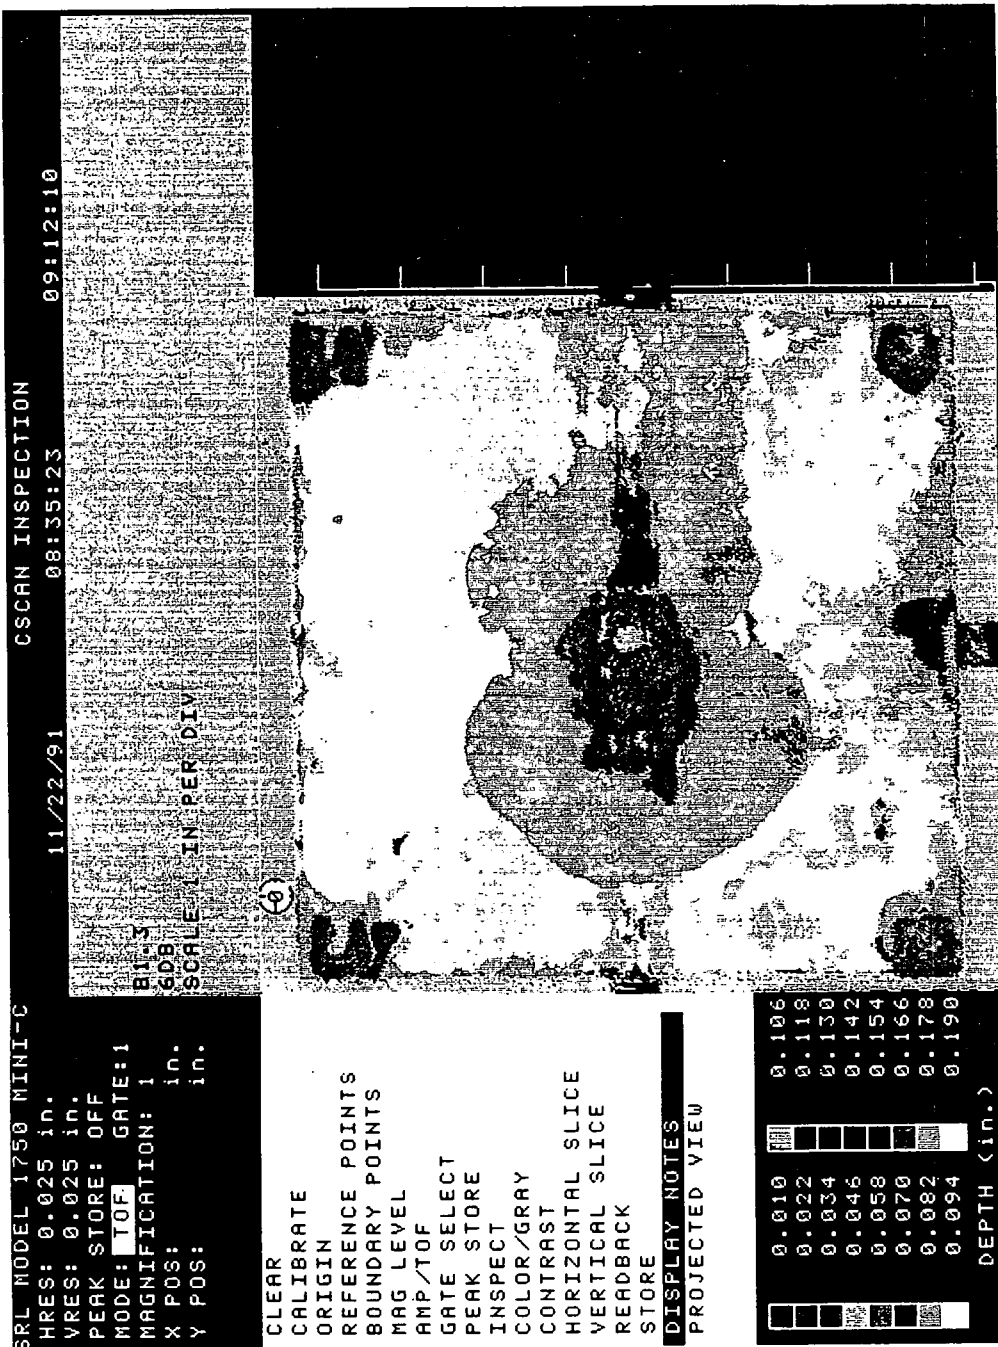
Typical time-of-flight C-scan (indicating delamination depth) of a post-bonded instrumented laminate (specimen B1.3).
